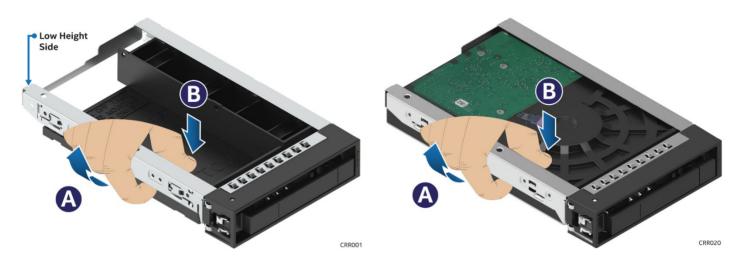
3.5" Drive Carrier Assembly - Drive / Drive Blank Removal
